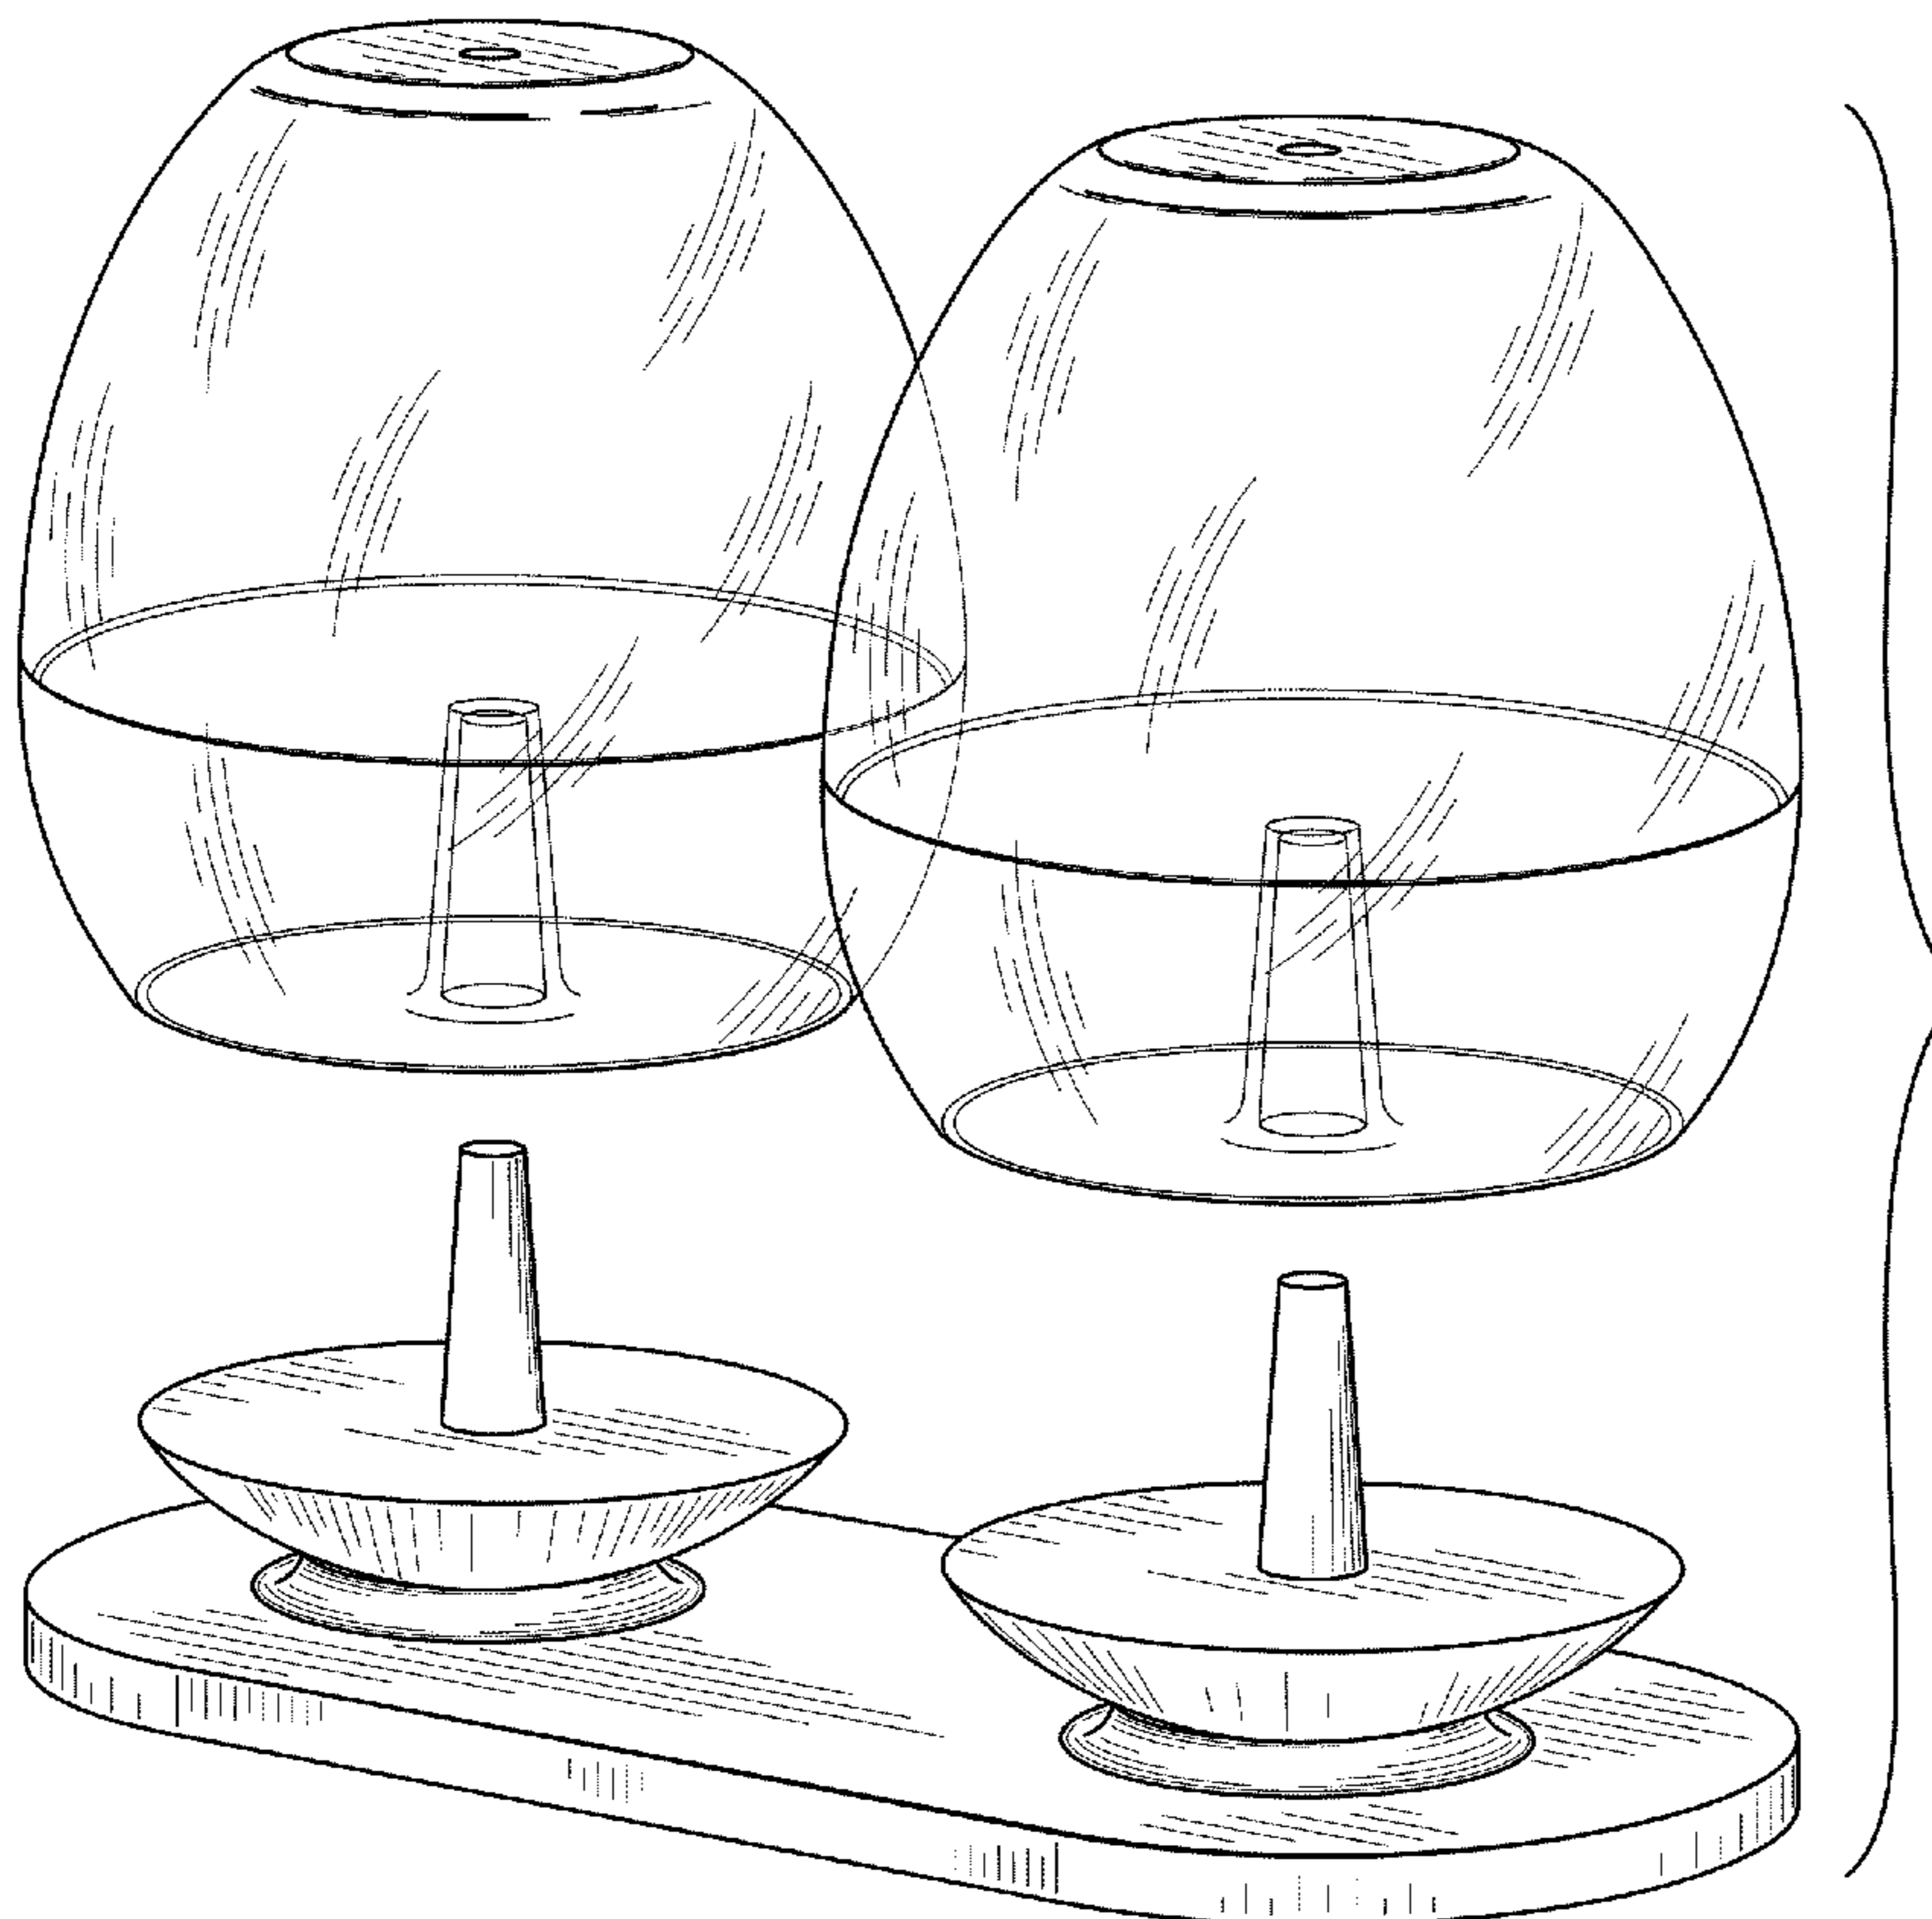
is an exploded perspective view of a salt and pepper shaker set, illustrating a first embodiment having two transparent containers, showing my new design;
